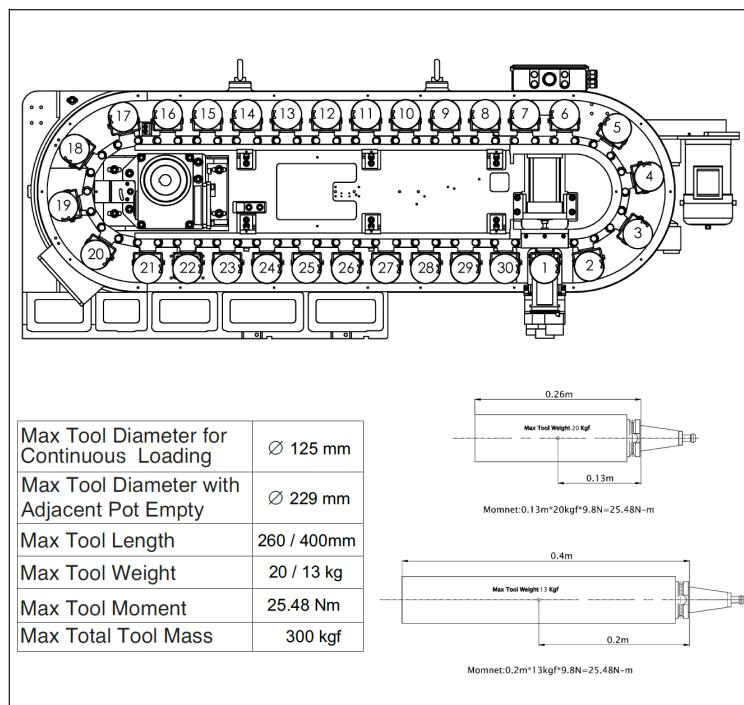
Standard HSK A-100 ATC30 Tool Shape Limits
